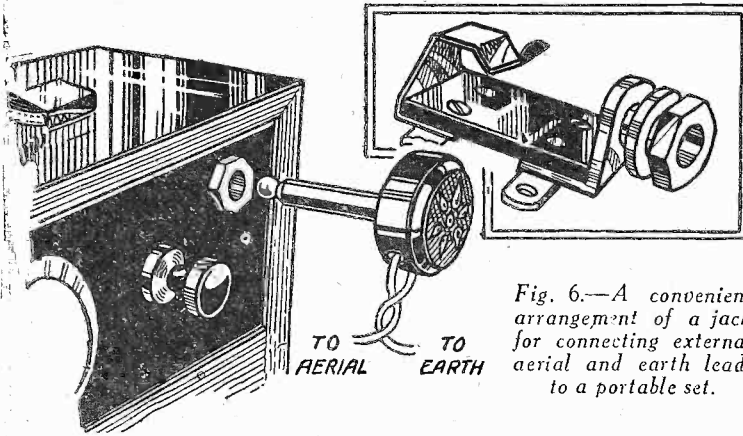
A convenient arrangement of a jack for connecting external aerial and earth leads to a portable set.
